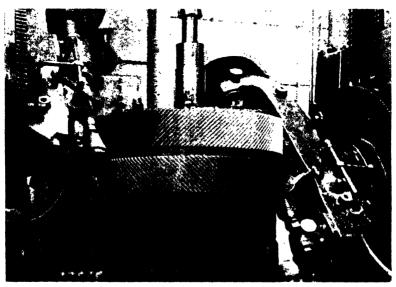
D.B.S. DOUBLE-HEADED HOBBING MACHINE
